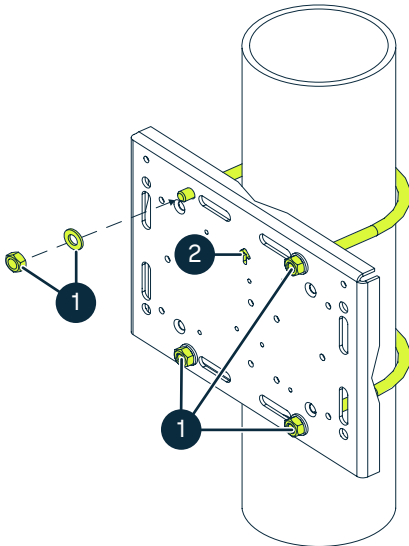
Attaching mounting plate to fixing brackets - vertical pole mounting
